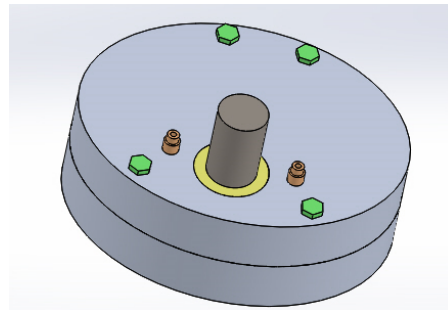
Schematic overview of the total designed actuator, assembled, sketched in SolidWorks.
